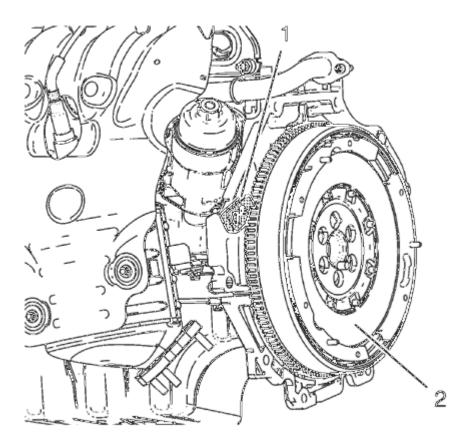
Flywheel And Flywheel Holder Courtesy of GENERAL MOTORS COMPANY
